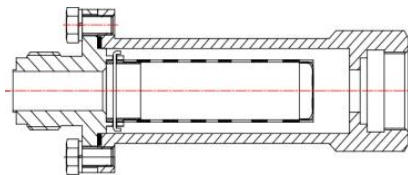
DN4~10 threaded connection turbine flowmeter filter
